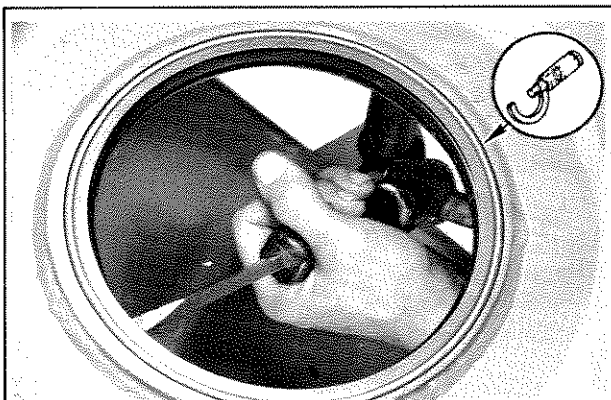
Removal Of Drum Shaft And Drum (Sheet 1 of 2)
